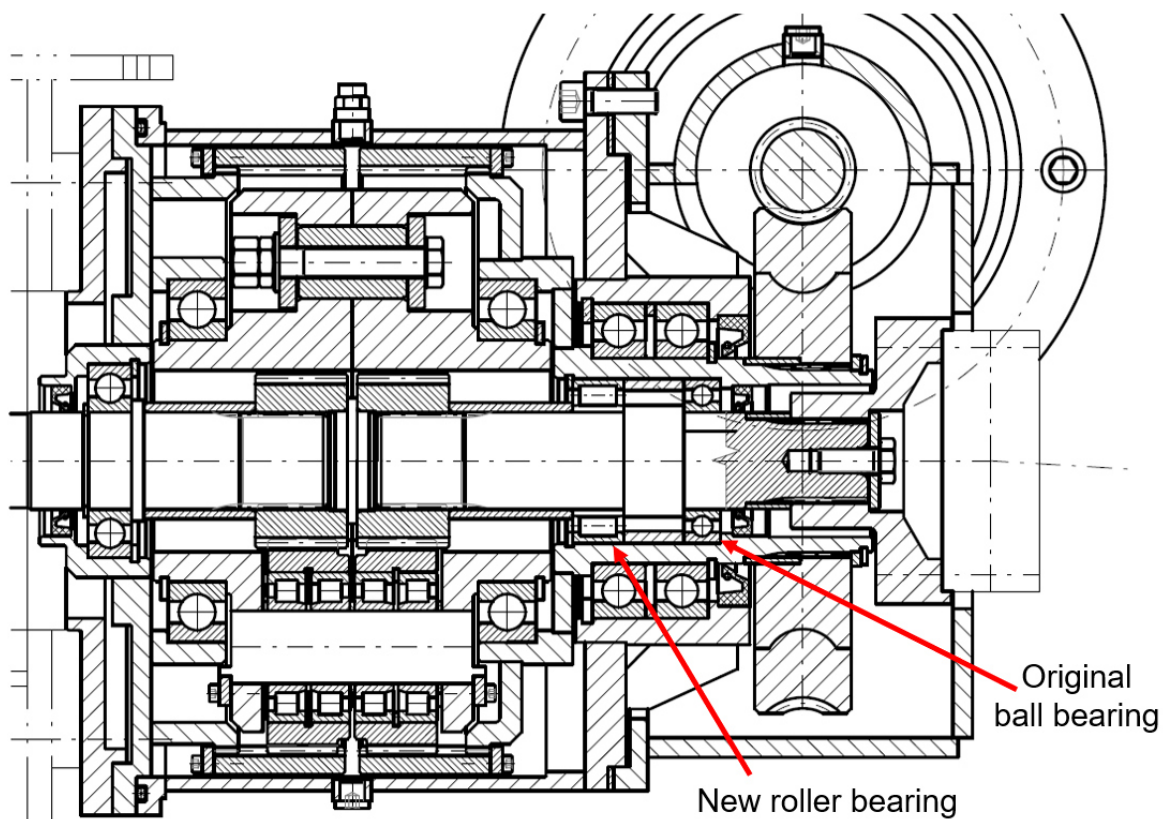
Cross section of the PTU with strengthened roller bearing.
